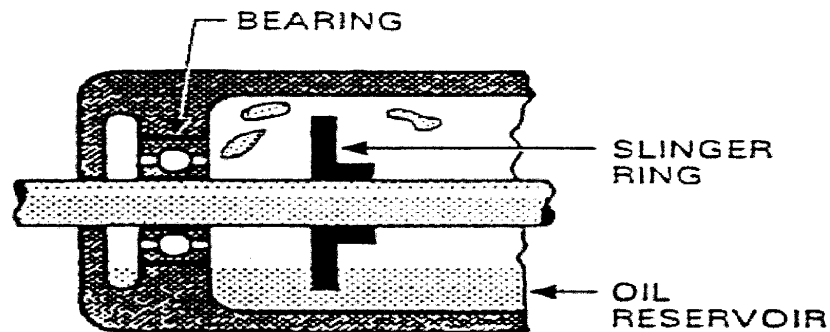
a.A diagram showing the slinger rings used for lubrication of the bearing
